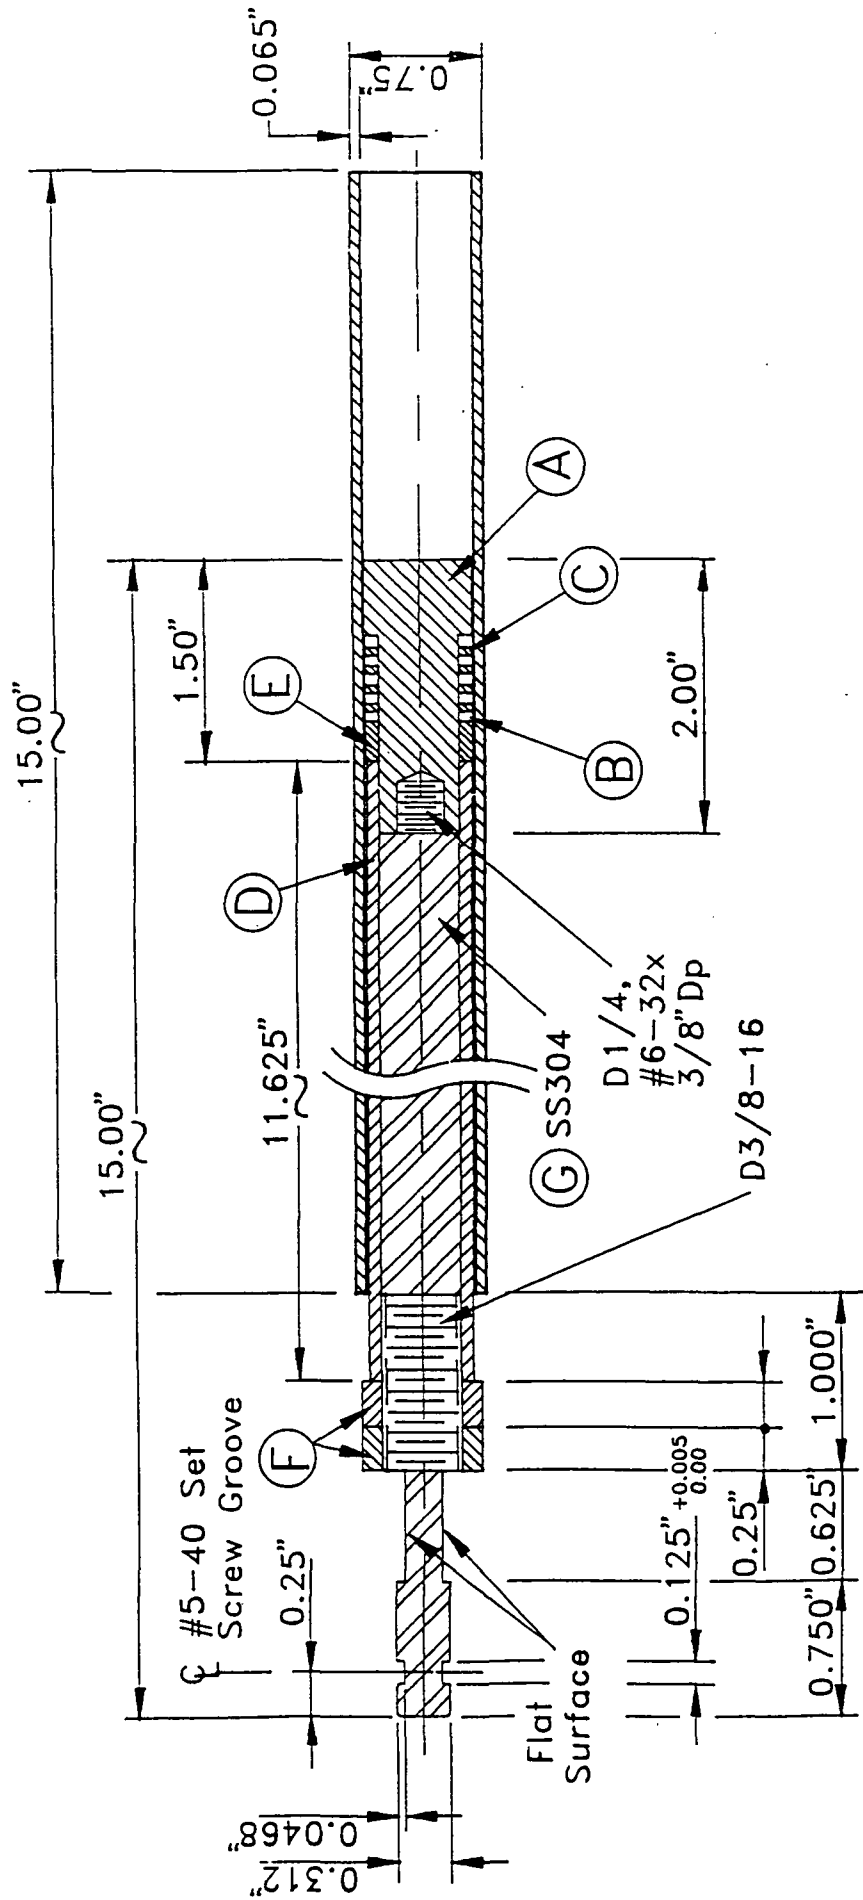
Assembly of Multi-stage Cylinder/Piston Design
